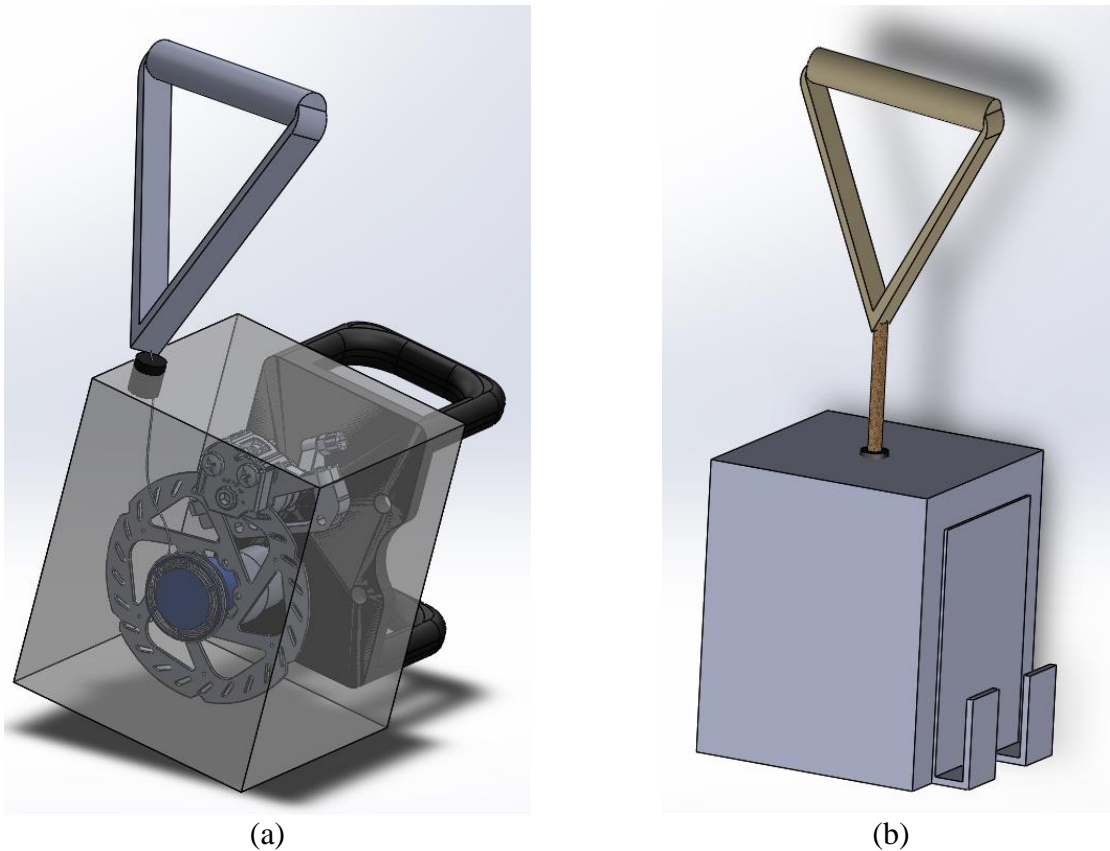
A older SolidWorks rendering of NovaBand’s rope and handle assembly, braking system, and mounting system encased inside a translucent housing. A newer rendering with an opaque housing and the mounting system visible.
